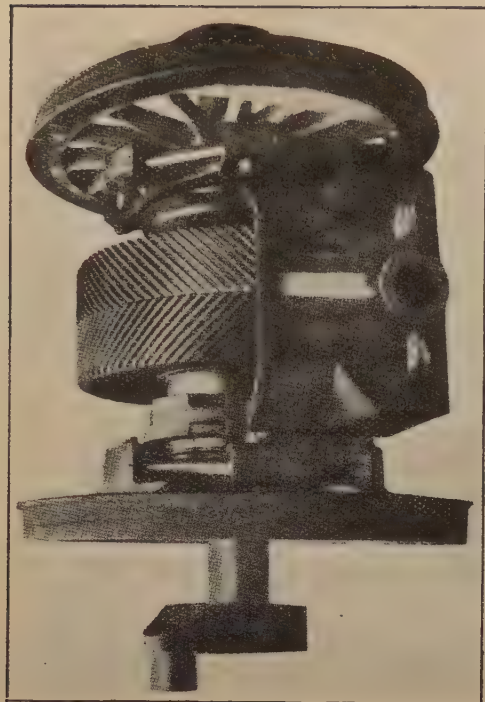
Driving axle, showing elastic drive from last gear wheel.
